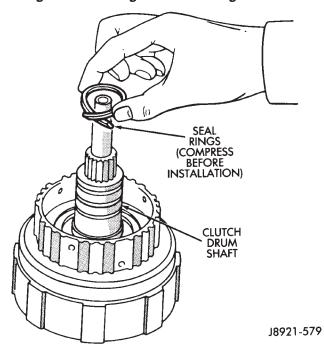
Installing Clutch Drum Shaft Seal Rings
